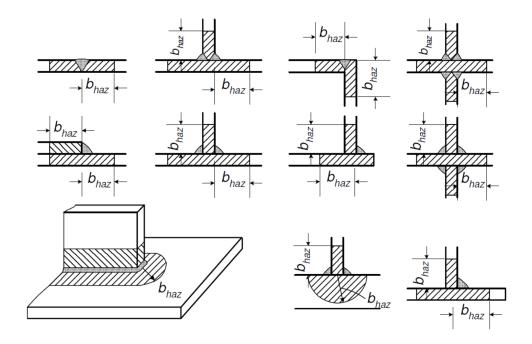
Extent of HAZ for different welding geometries [2].
